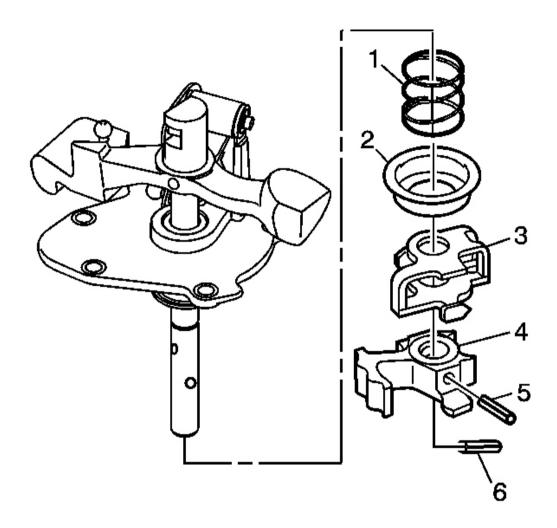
View Of Shifter Roll Pins & Control Levers Courtesy of GENERAL MOTORS CORP.
